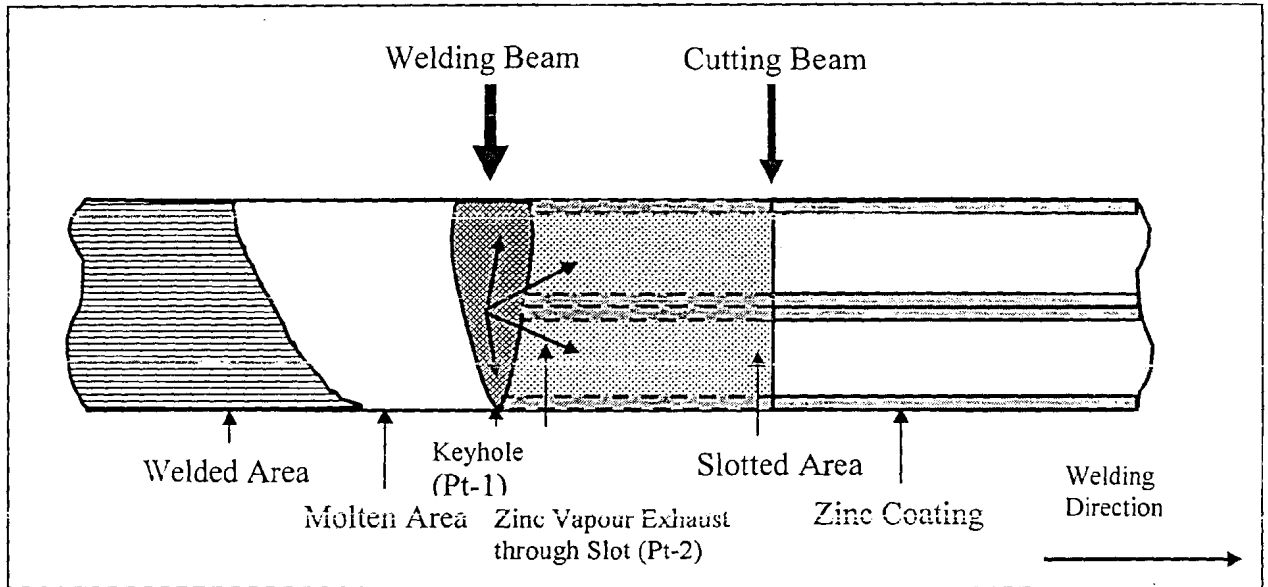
Side view of the welding operation with the two beams in tandem
